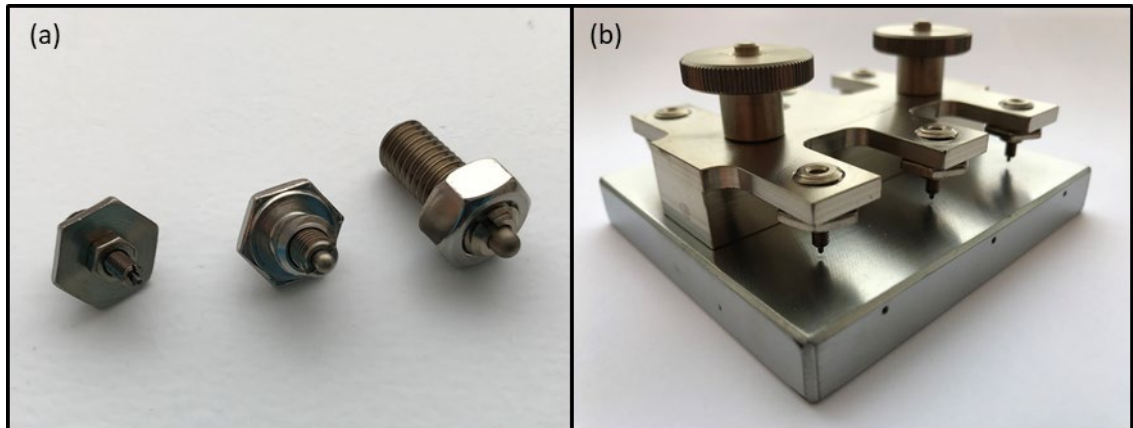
Spring ball plungers (a) and fixture (b) used to fabricate test structures.
